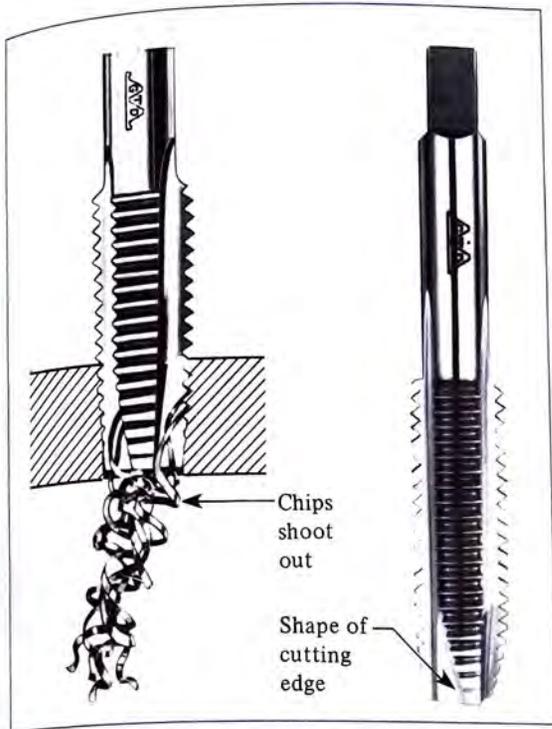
Cutting Action of a Plug Gun Tap
